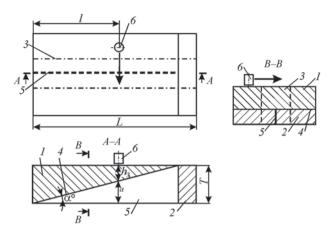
Composite multi-valued RS for simulation of surface and subsurface defects in flat TO with a weld: 1, 2 — wedge-shaped parts; 3 — weld area; 4 — butt; 5 — AD; 6 — ECP
